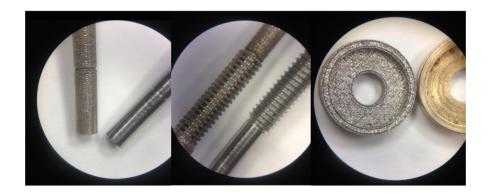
Comparison of the printed shafts and the parts produced on (CNC) lathe
